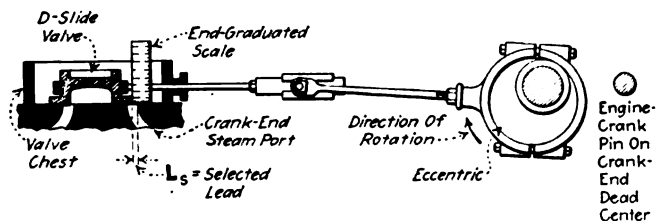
Setting a plain slide valve for a selected lead, L_s . (Engine is in crank-end dead-center position.)
